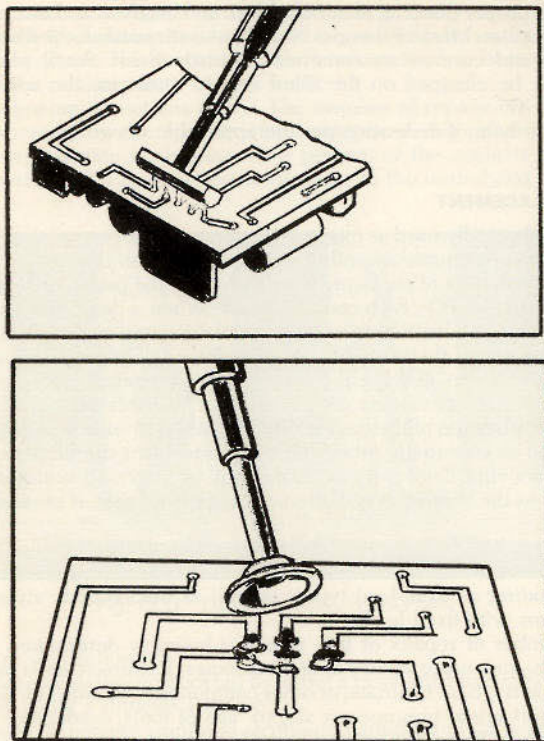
Not recommended use of heater blocks for multiple-lead⁷ components in plated-through hole joints.
